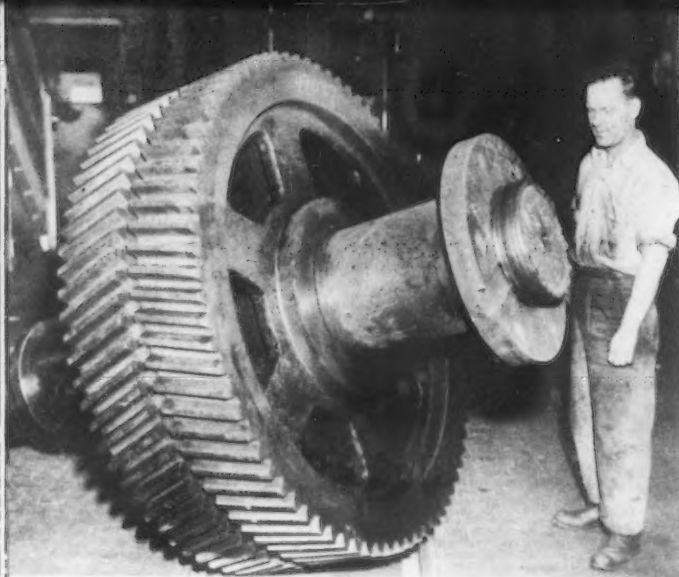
Welding the head of this ingot nicking lathe shaft was done without dismantling the setup. The savings from this alone is believed to have paid for the welding.
